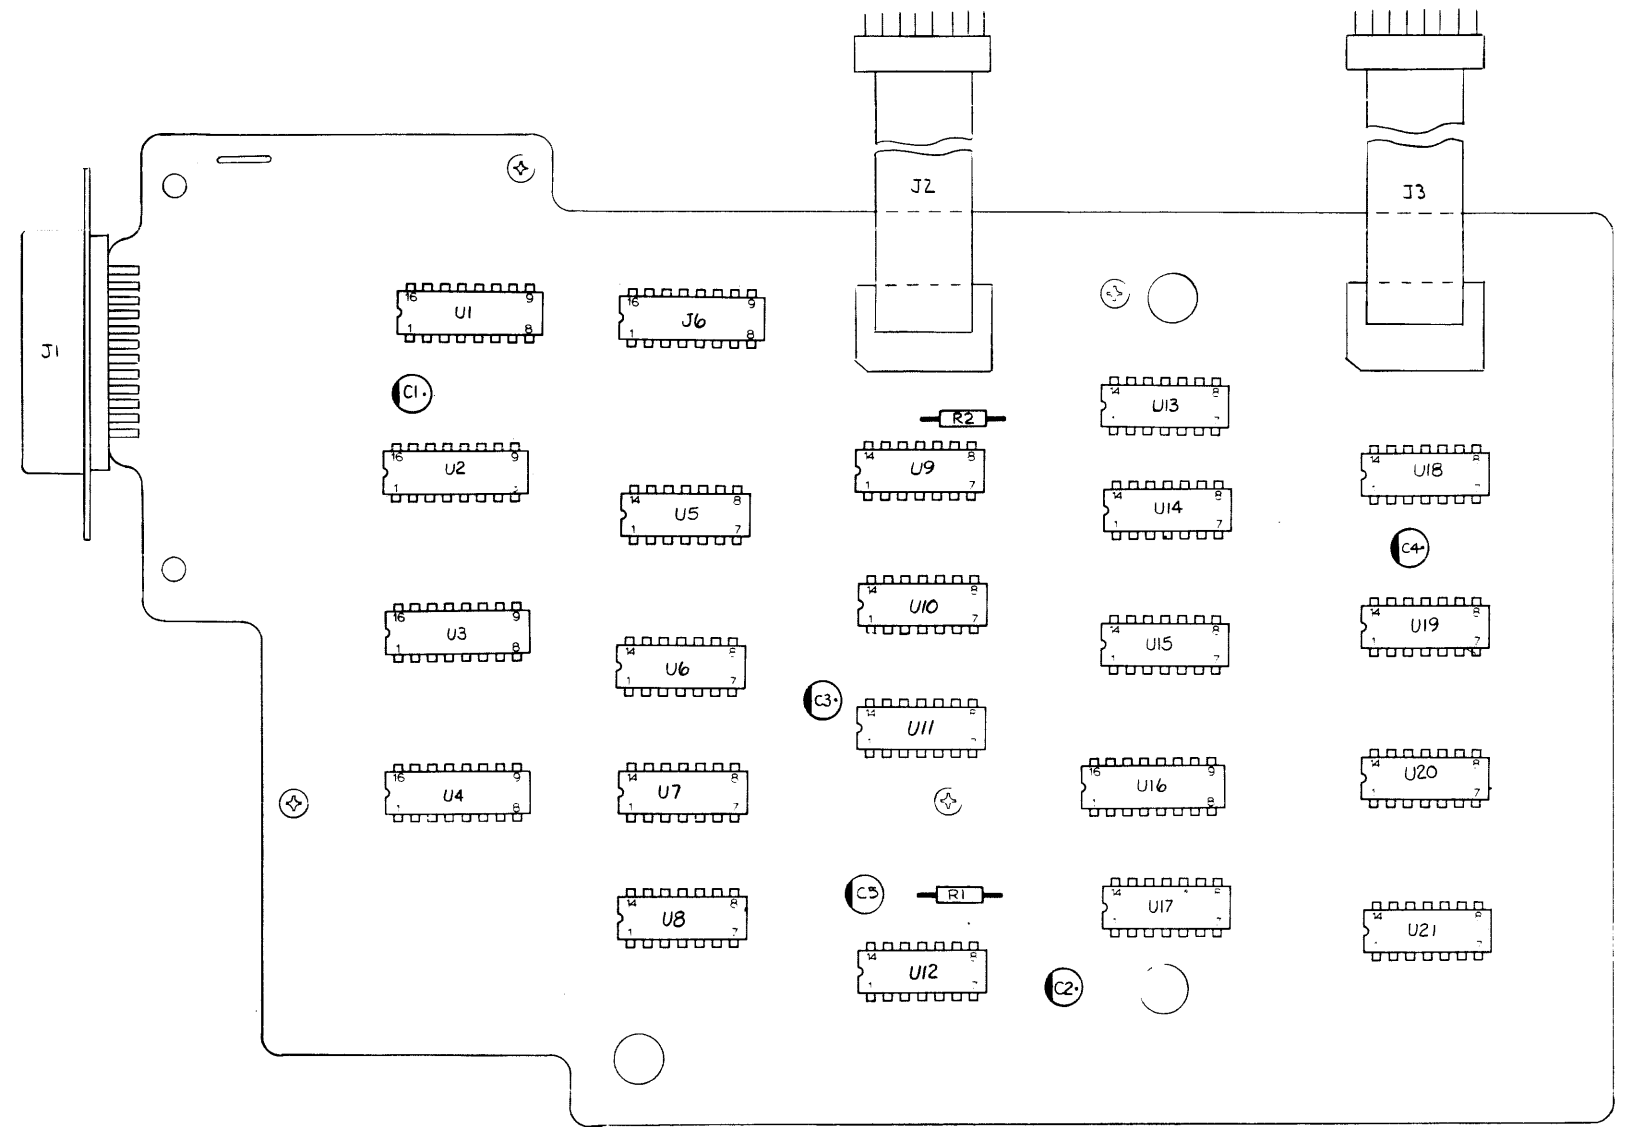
A16 IEEE-488 Bus Interface PCB Assembly, -15 Option
